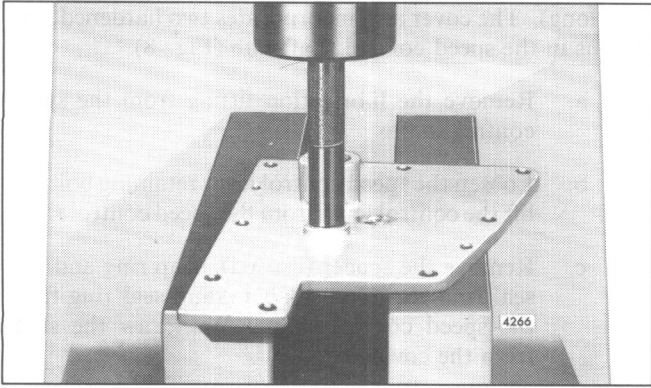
Removing Stop Lever Shaft Bushings from Governor Cover using Tool J 8985
